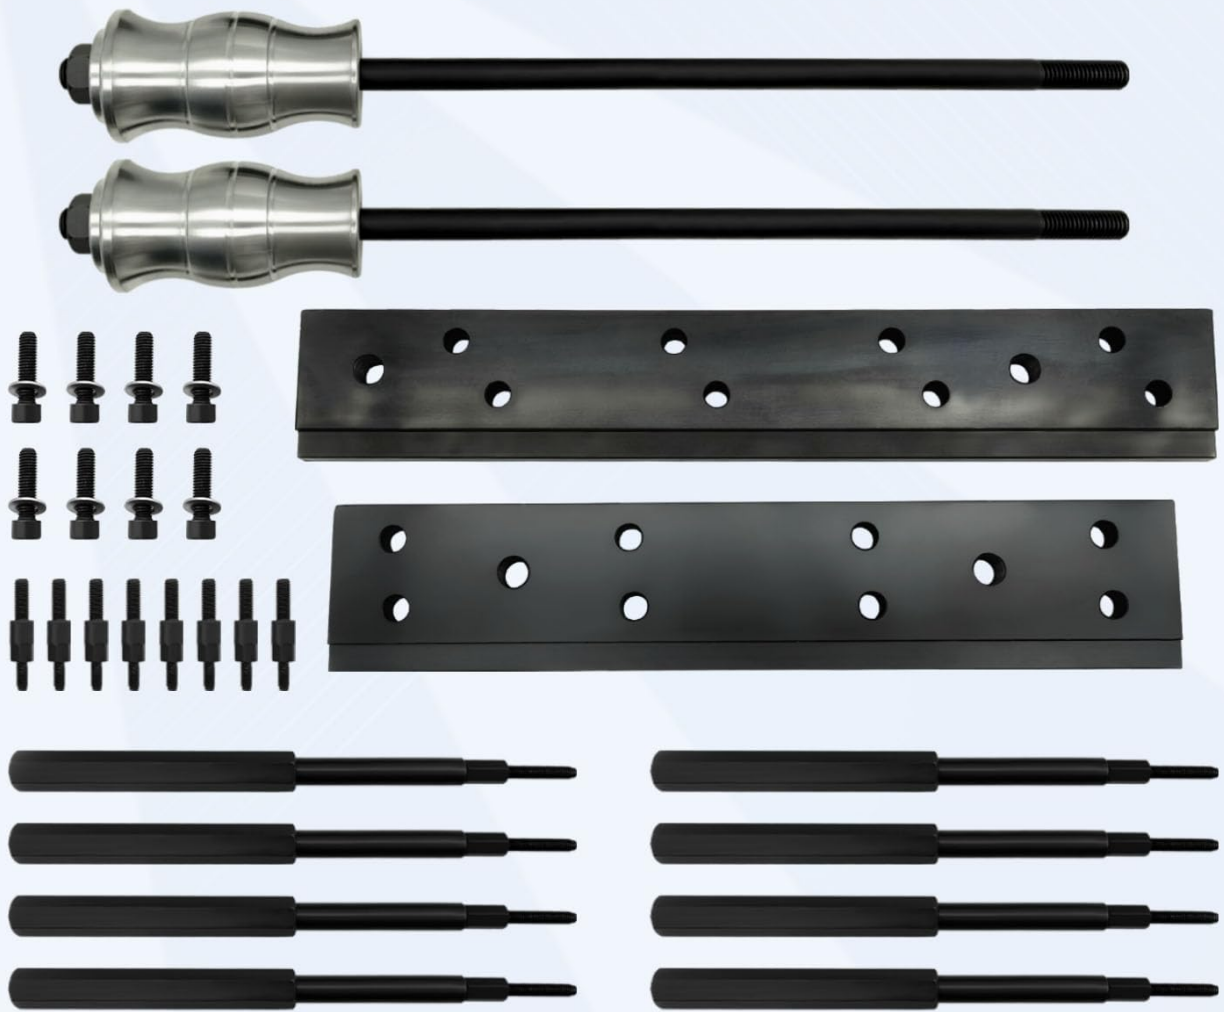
Detailed view of the fuel injector disassembly tool components, including pullers, adapters, and support plates.
